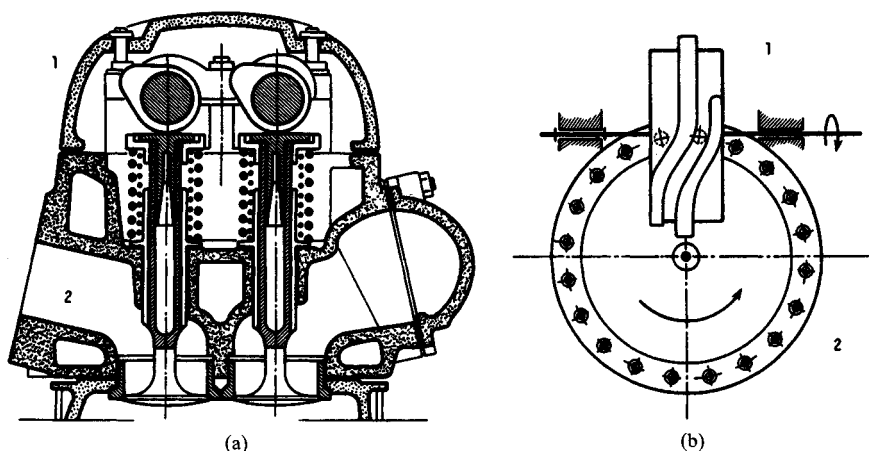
(a) Planar cam mechanism of the internal-combustion-engine D-R-D-R type; (b) spatial cam mechanism of the 16-mm film projector R-D-R type.
